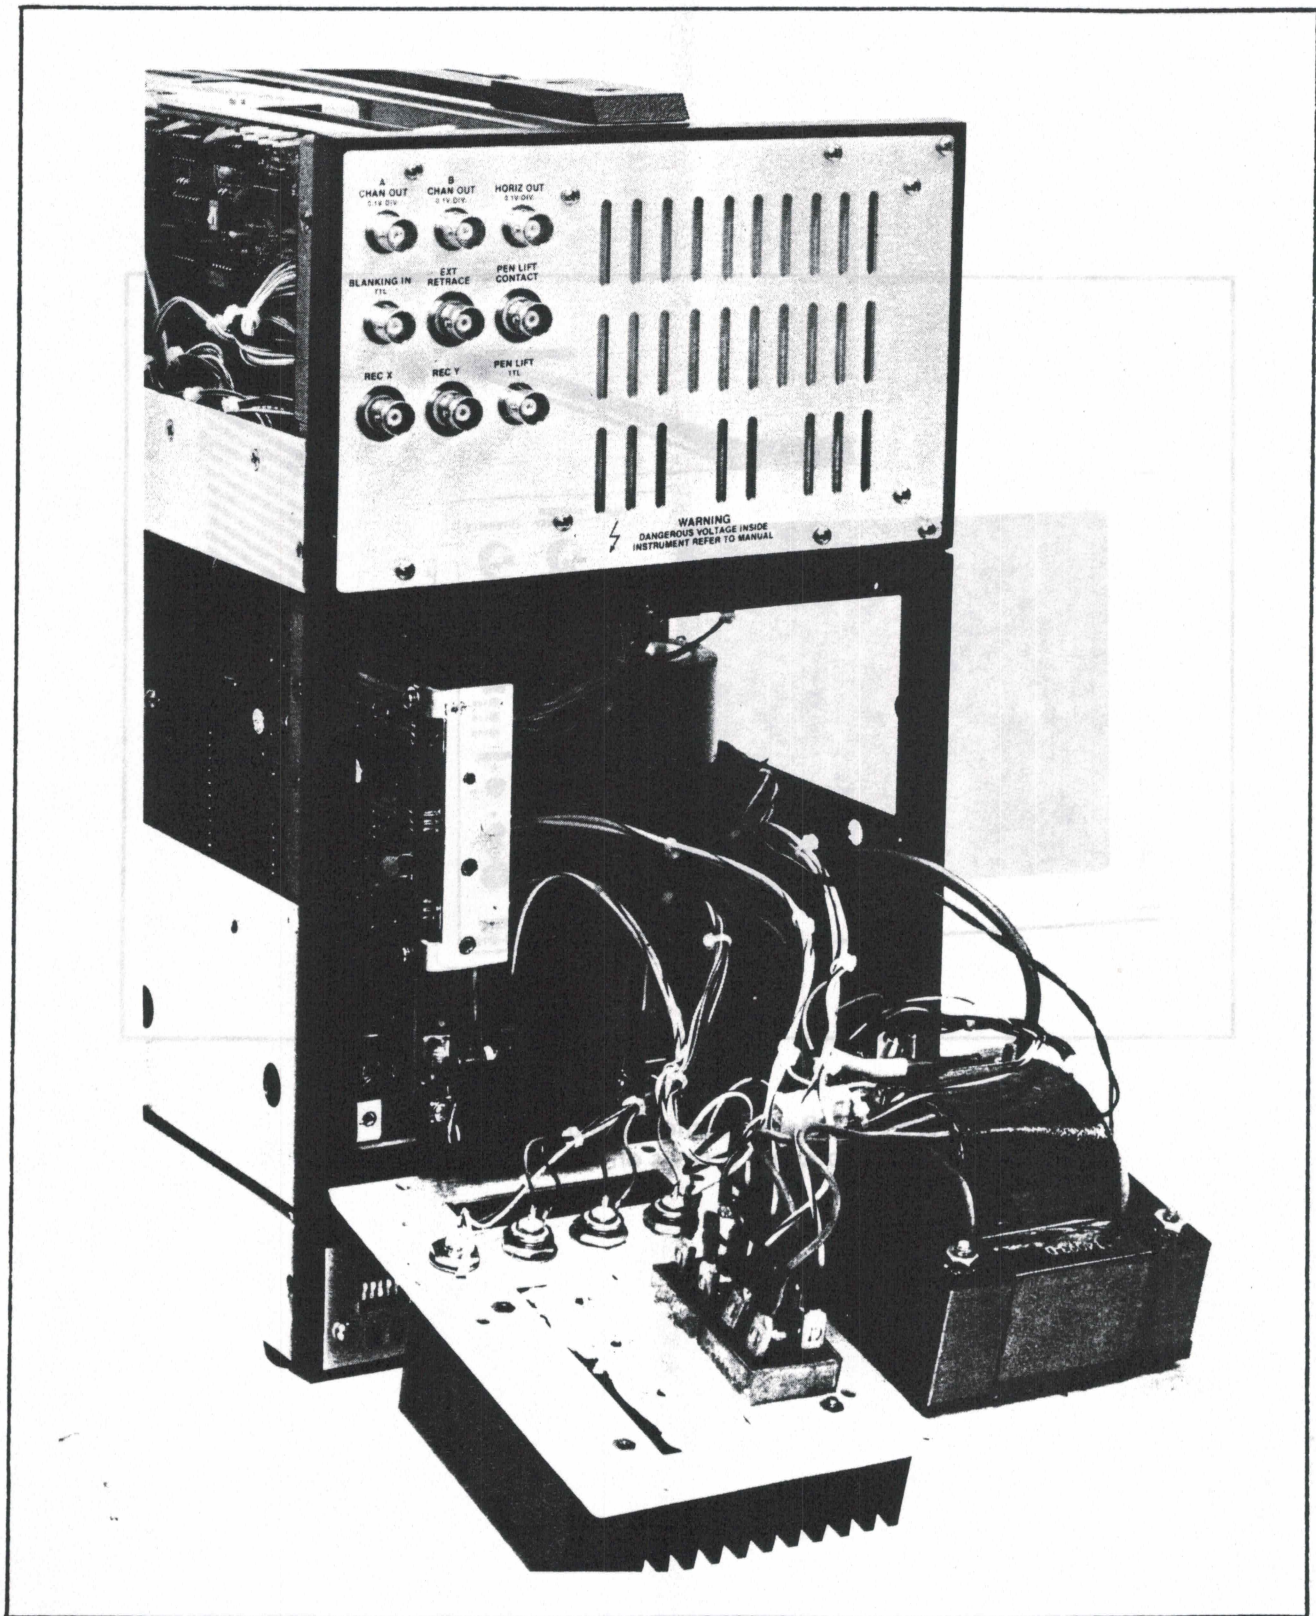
Low Voltage Power Supply (A3) Disassembled
